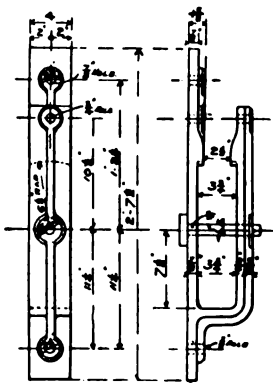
AND 1146.—ROOF ROPE SHEAVE.
